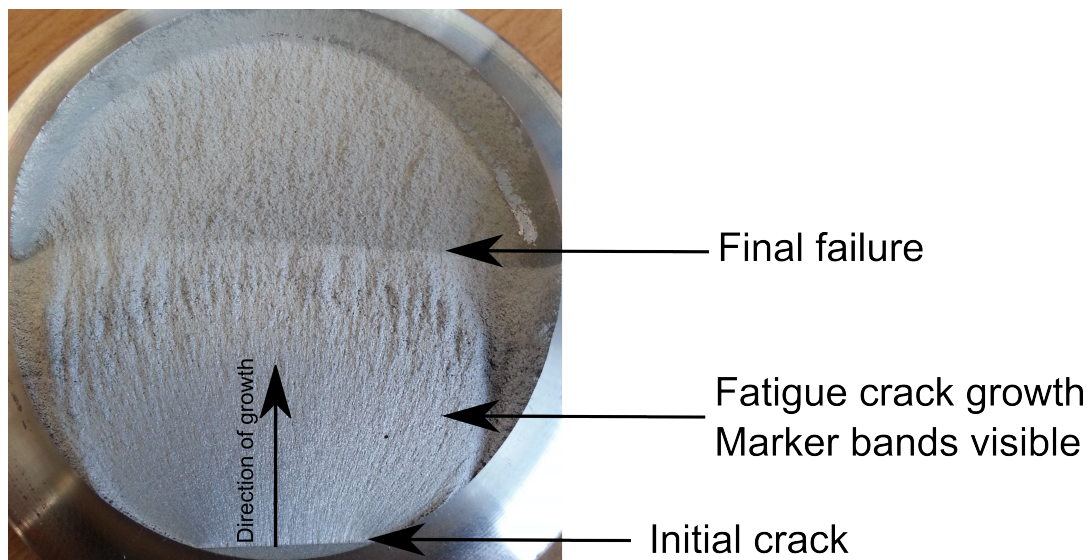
Overview of the fracture surface of specimen 2B116; the fracture surfaces of the other specimen had the same characteristics (except for specimen 1Z06).
